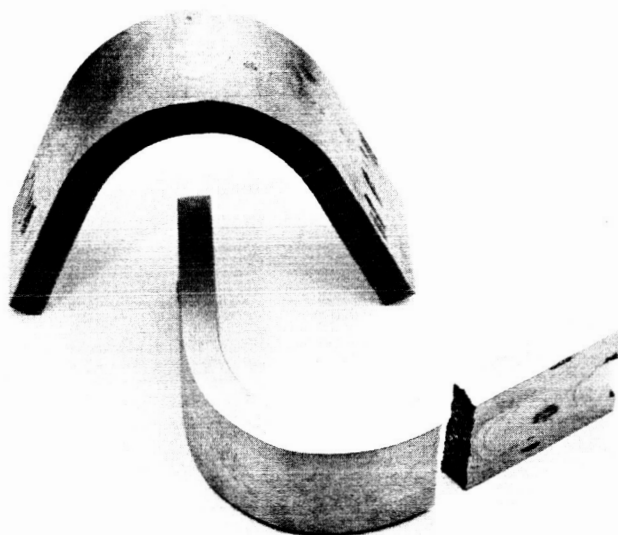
Ta-10W Plate Weld Bend Specimens
